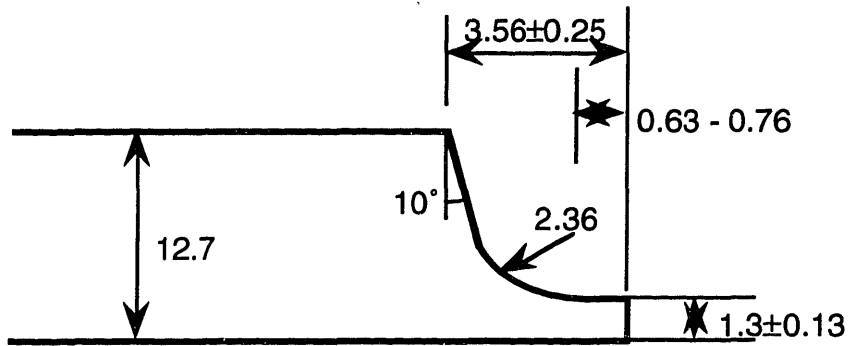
Single U-groove with mixed angle design used for automatic pulsed-gas tungsten arc welding. (in mm)
